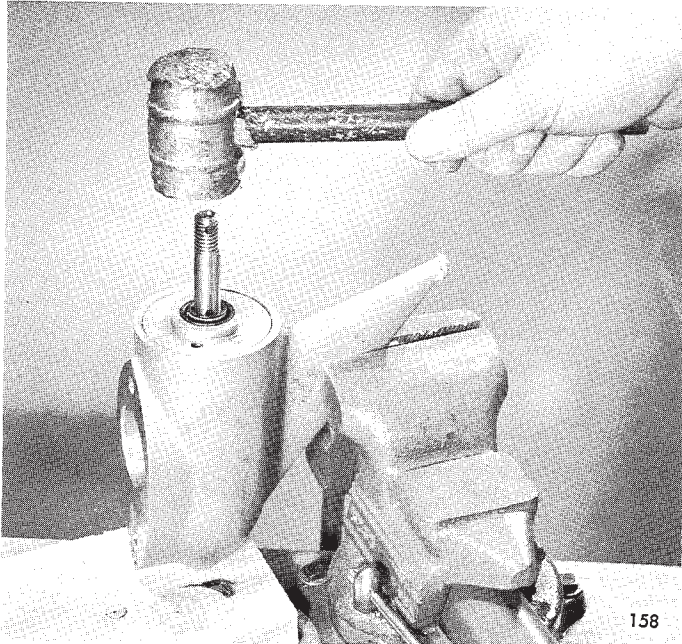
INSTALLING BEVEL GEAR BEARING
